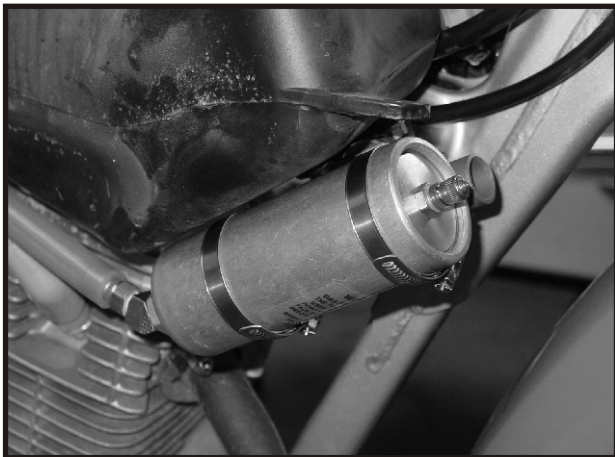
Reservoir mounts to the bracket supplied with the shock. Late model XR shown. Remove the gas tank bolt and position the bracket over the gas tank tab. Reinstall the tank mounting bolt. The bracket should angle up towards the front.
